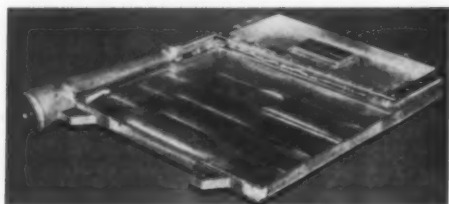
Left — Magnesium cooler-plate assembly for electronic mountings
